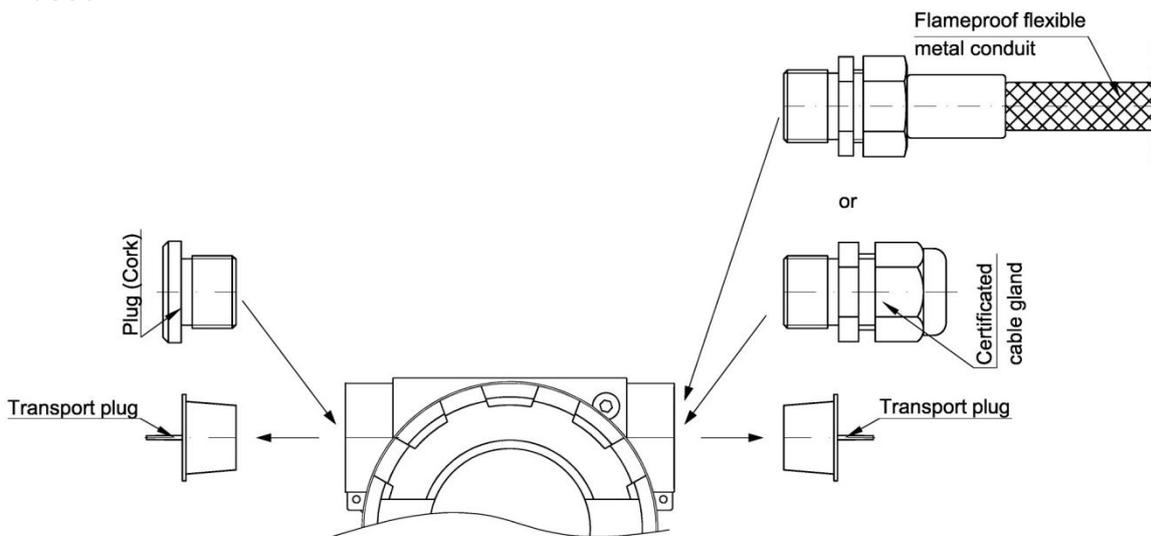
Installation of cable entries or flameproof metal conduit and blinding plugs
